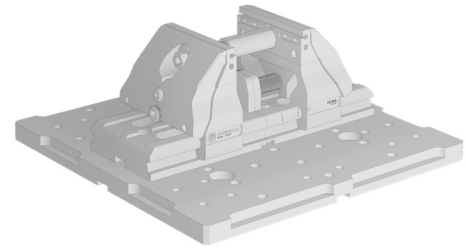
Clamping system centred on 400x400 mm adapter plate
